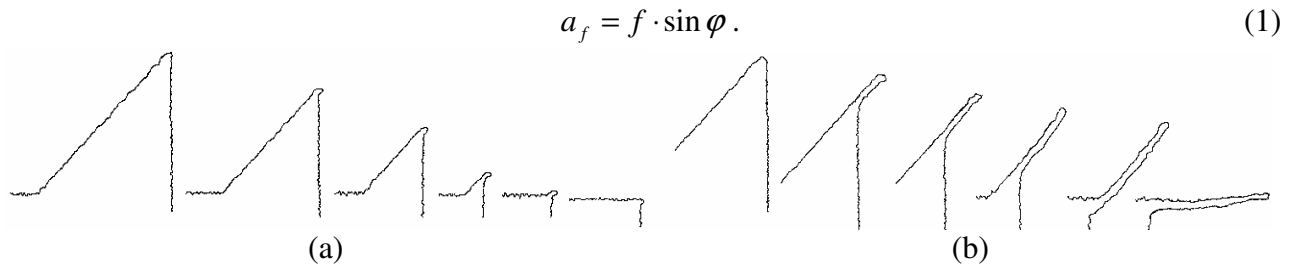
Burr formation when rake angle (a) $\alpha = 20^\circ$, (b) $\alpha = 0$ [$\varphi = 47^\circ$, the rest as in Table 2].
